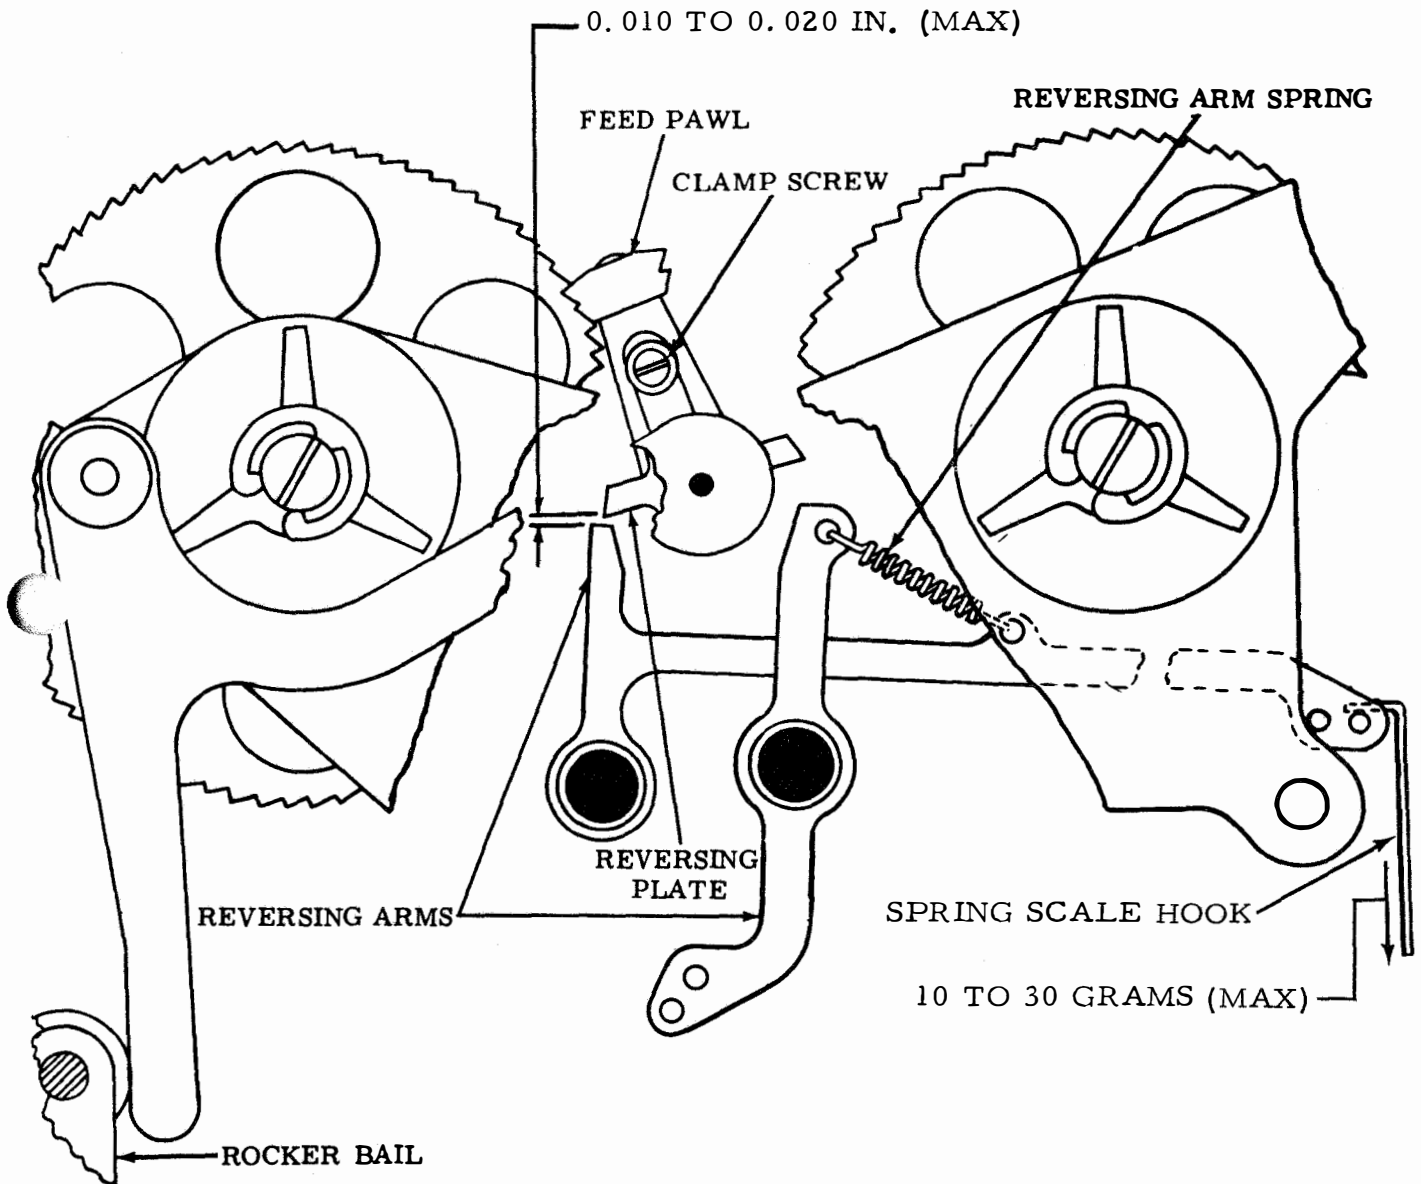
Ribbon Reversing Plate and Ribbon-Feed Reversing Arm Spring, Reperforator, Rear View
